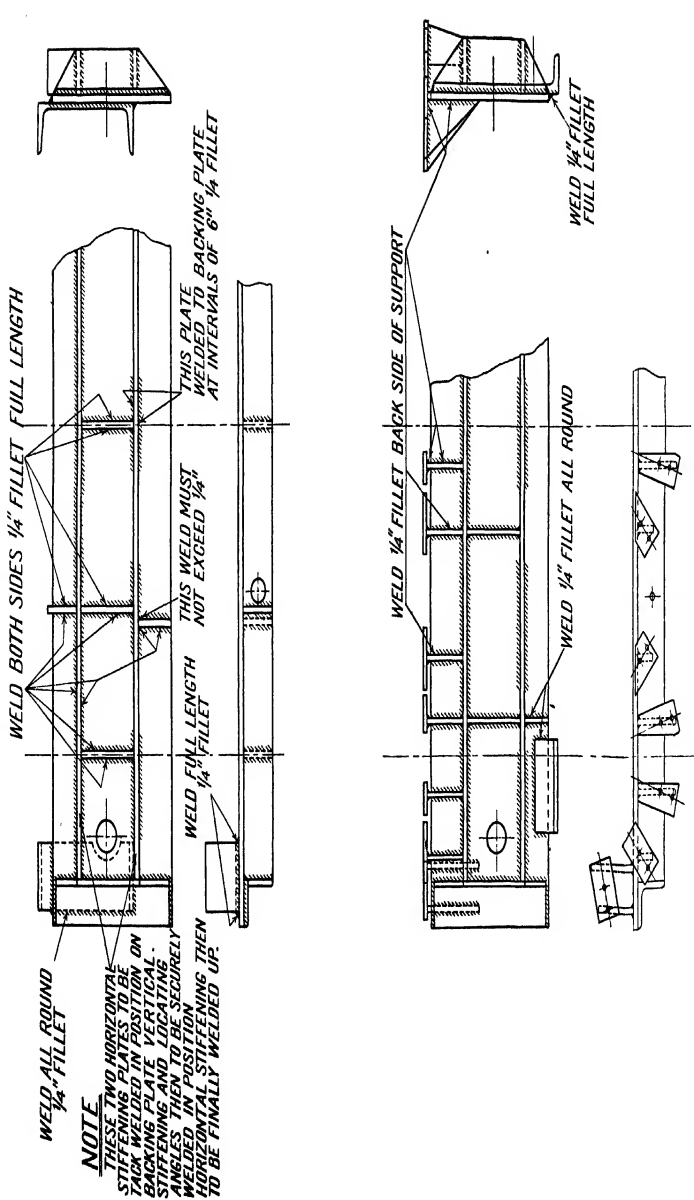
The drawing shows fabricated frames for top and bottom yokes of a large three phase transformer. This has three limbs over which the three coils fit, and the drawing shows the centre lines of the first and second cores, the third core being repeated symmetrically to the left. The coils which surround the transformer core rest on the radiating plates shown in the lower view. The frames are from mild steel plate $\frac{1}{2}$ - $\frac{3}{8}$ in. thick and stiffened by webs so that the laminated cores can be clamped on uniformly at a pressure of about 100 lb. per sq. in. Care must be taken when welding to see that the webs are tack welded in position in a correct sequence. This is chosen as a result of practical experience to bring distortion to a minimum and in general is similar to the method used in tightening down the cylinder head bolts of a six cylinder engine, that is working alternately. (Scale 1 : 12.)
